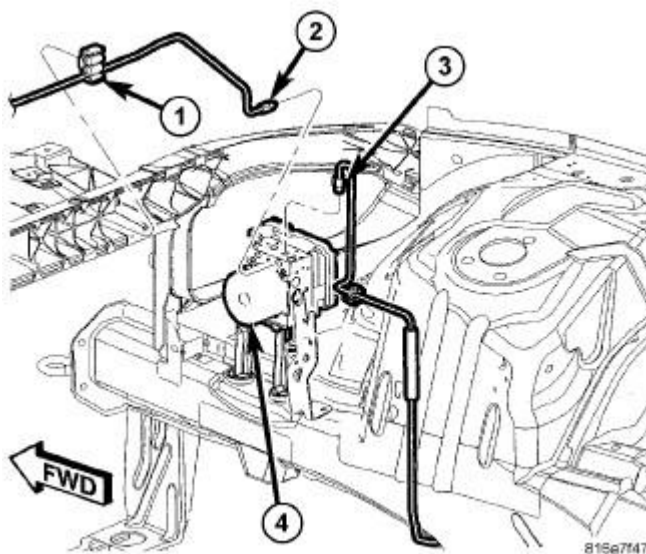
Left Front And Right Front Brake Tubes At ICU
